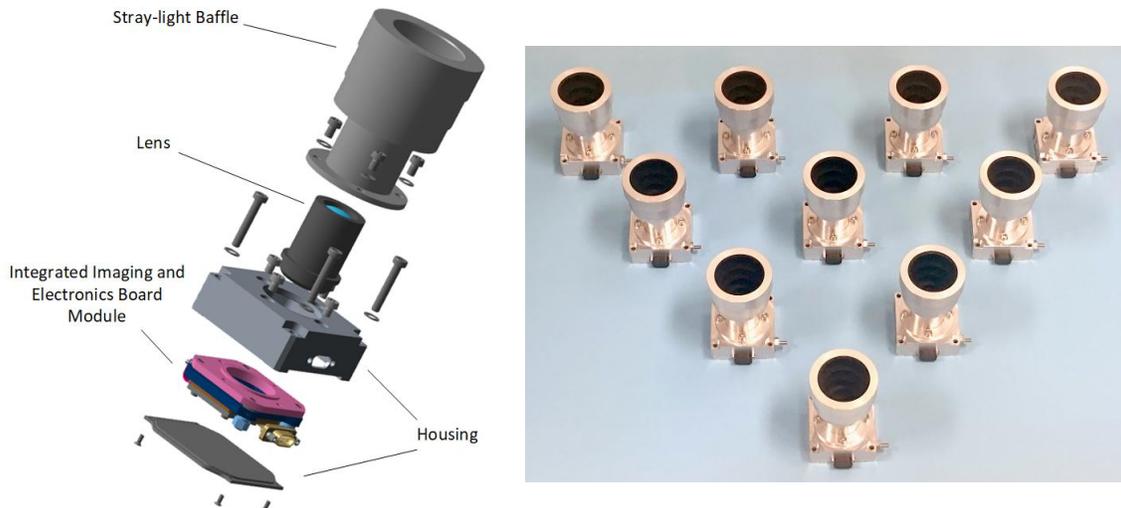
Exploded view of the ASTRO[®] CL showing the main modules (left), ASTRO[®] CLs lined up for final visual inspection (right).
